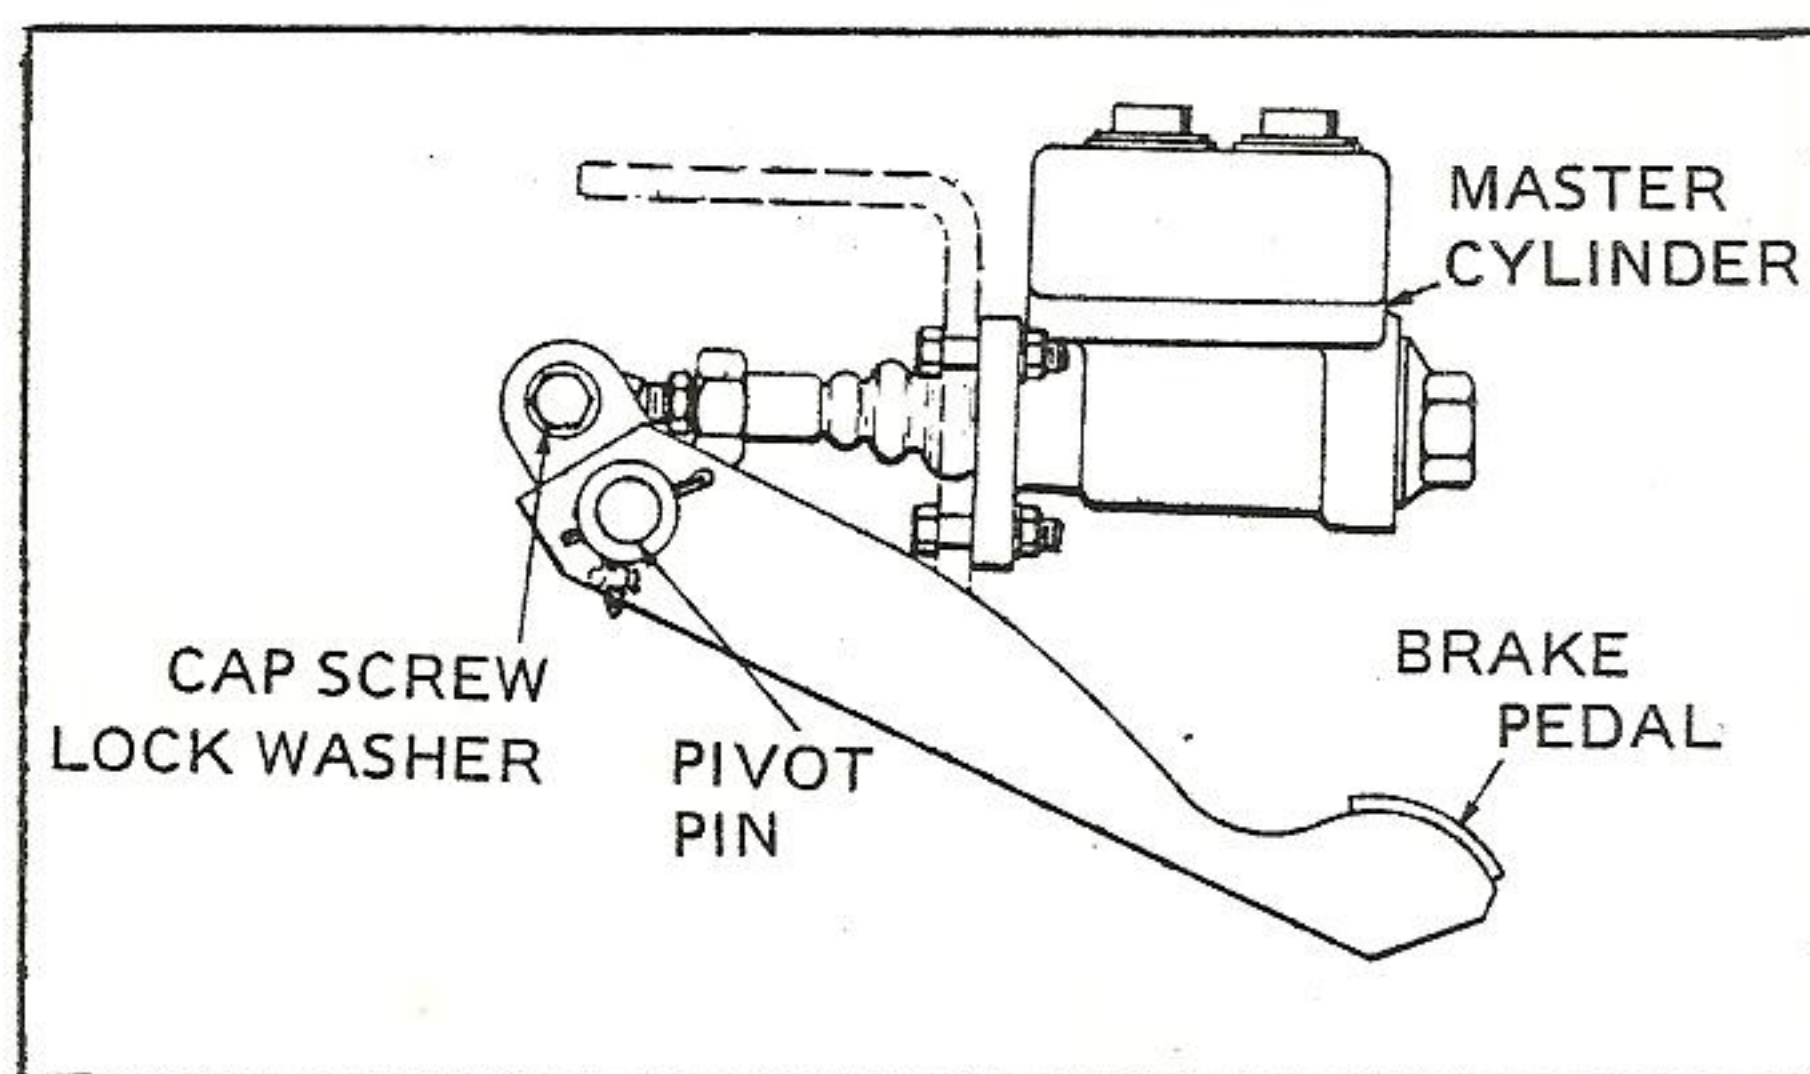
8. HYDRAULIC BRAKE CYLINDER ASSEMBLY
